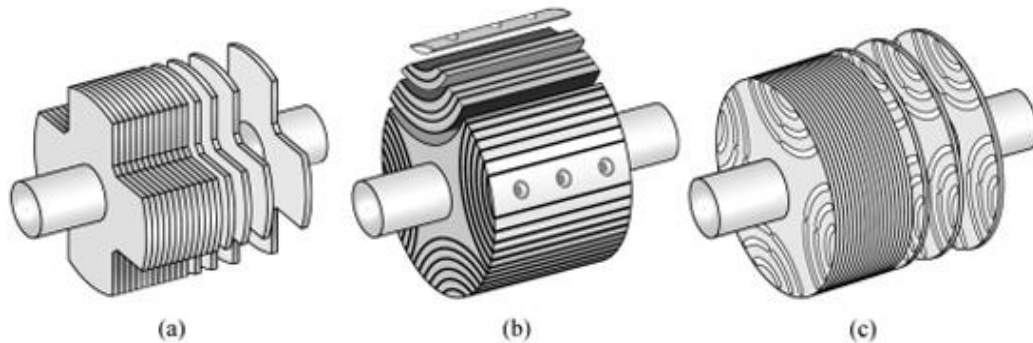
Possible rotor design for a SynRM: (a) Simple salient pole (SP) rotor, (b) Axially laminated anisotropy (ALA) rotor, (c) Transversally laminated anisotropic (TLA) rotor.
